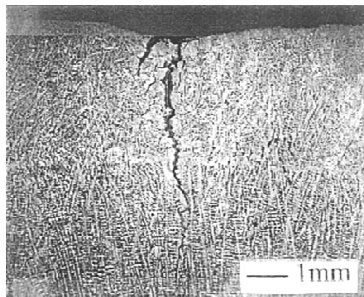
Longitudinal crack on a slab (transversal section)
